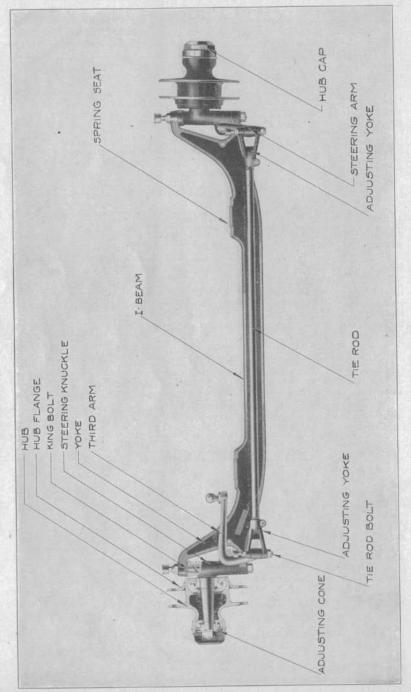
Front Axle and Section Through Hub Showing Internal Construction.
